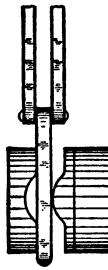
Contacts pitted. A flat .020" gauge spaces contacts .040" to .050"
